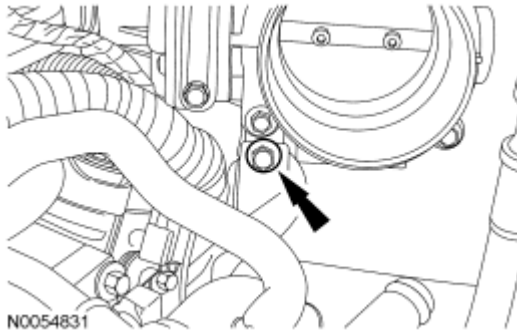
Locating Upper Intake Manifold Support Bracket Bolt
